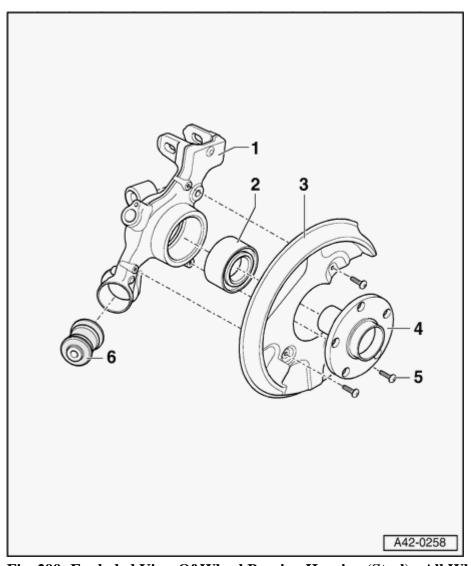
Exploded View Of Wheel Bearing Housing (Steel) - All Wheel Drive
